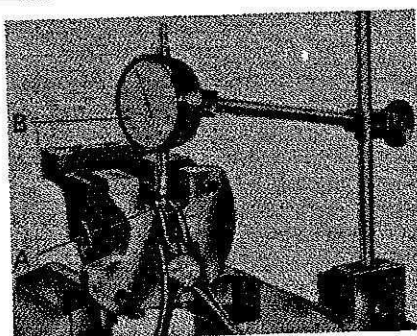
View showing dial indicator being used to adjust traction control valve; refer to text for procedure.
